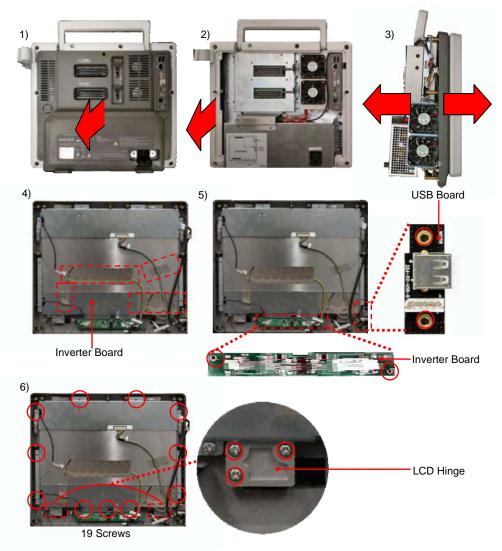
PSA & Rear & Rear FAN & Handle
